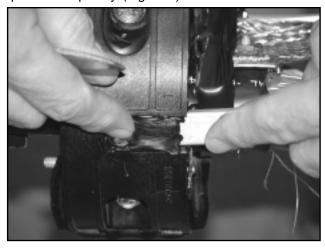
FILL TORQUE BAR POCKET WITH MASTIC SEALANT
